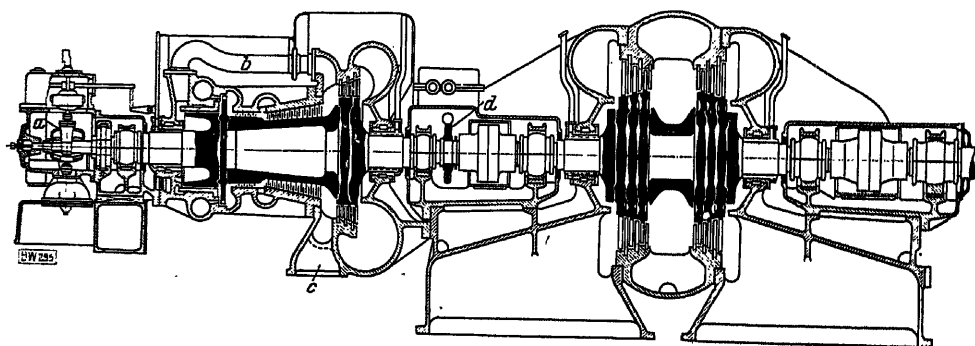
S.S.W.*, 30,000 to 40,000 kw., 3000 R.P.M., two-casing high-pressure turbine
